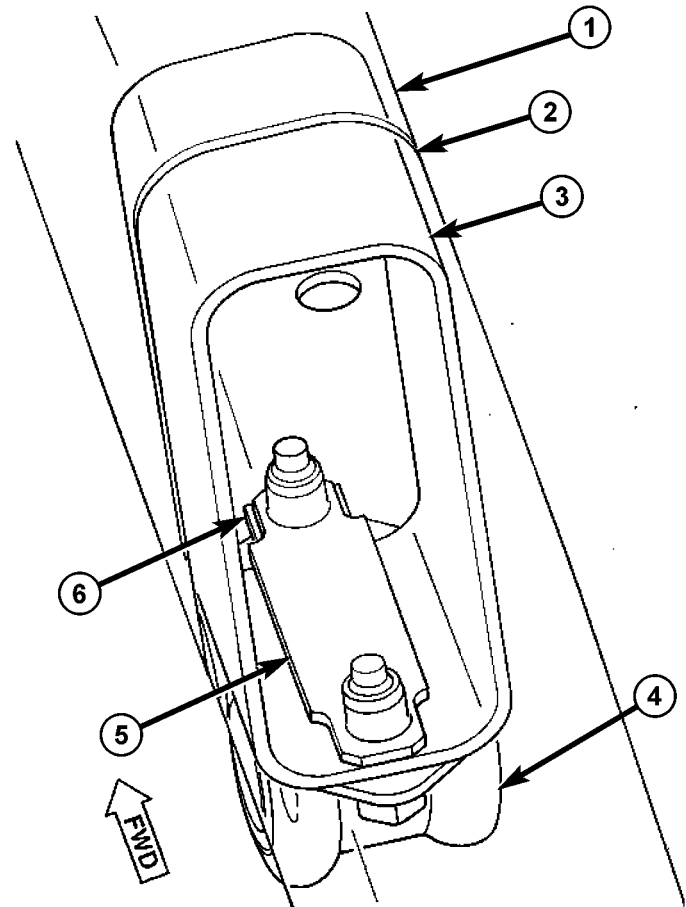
4X4 TAPPING PLATE/SLEEVE INSTALLATION
